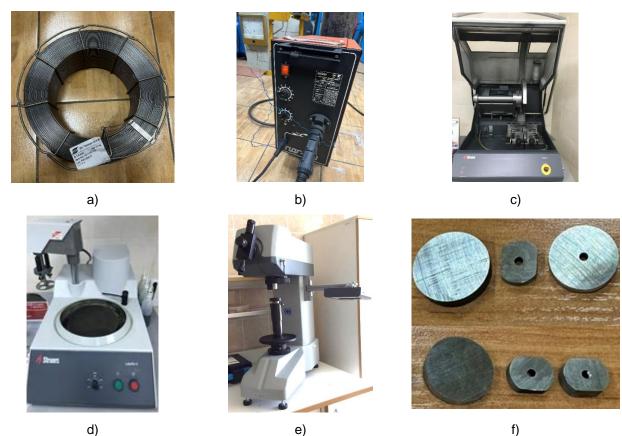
Used materials and equipment: a – ESAB OK Tubrodur 35 GM; b – semi-automatic welding machine PDG-252; c – automatic desktop cutting machine UNITOM-2; d – automatic machine for grinding and polishing LABOPOL-5; e – hardness tester WILSON VH1150; f – samples from busbar punching tools
